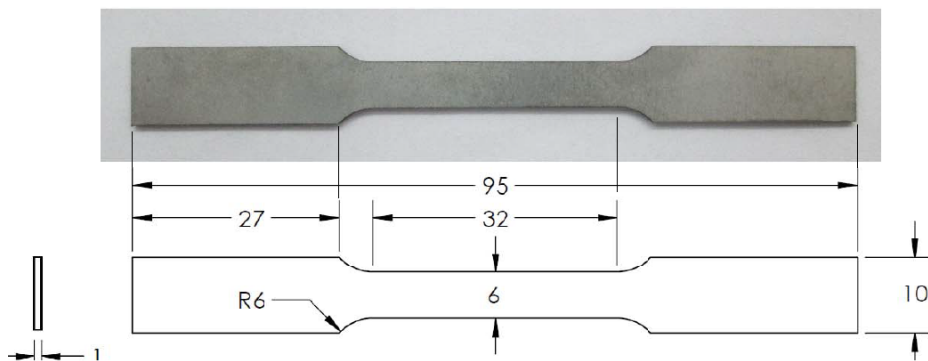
Dimensions of NiTi Tensile Test Specimen in mm.
